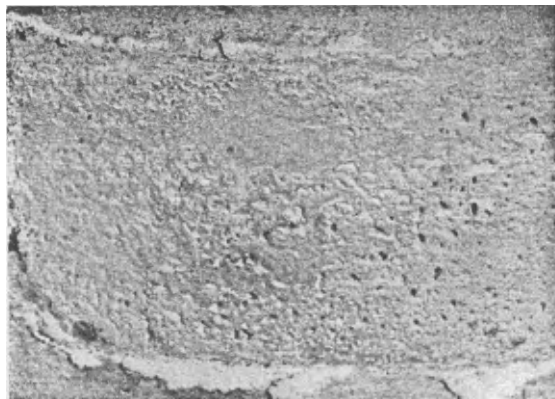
and b. Junction wheel disc-wheel disc cooled by chills. The whole wheel is fed by a simple side feeder head.
